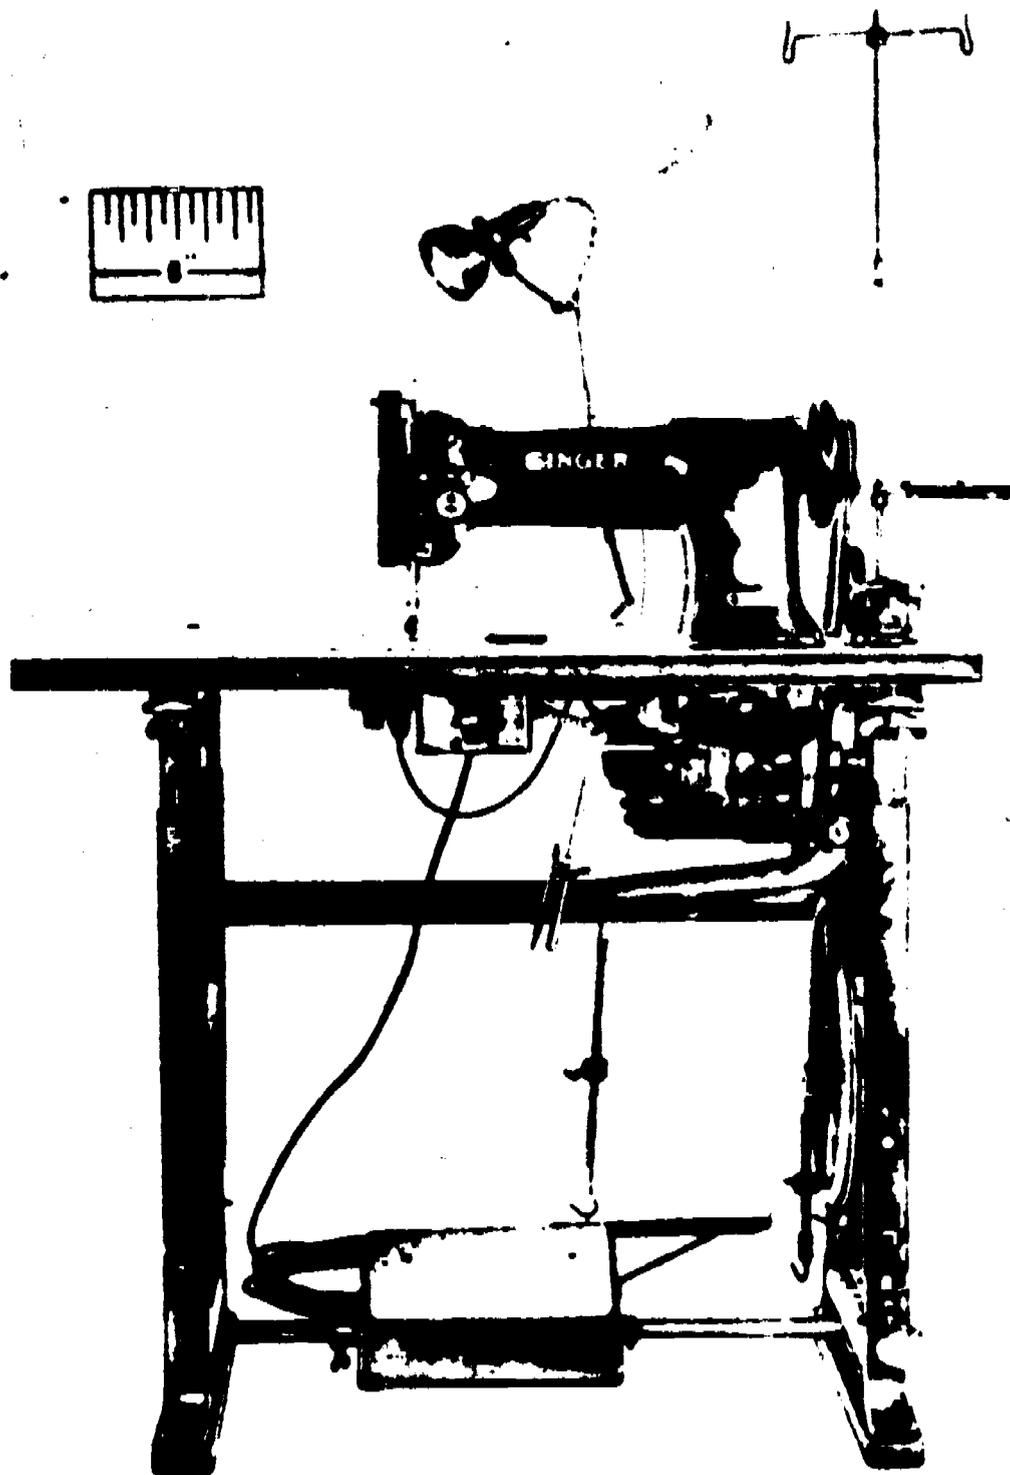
Model 111x155 machine, of which there are two, used on mobile trailer.
